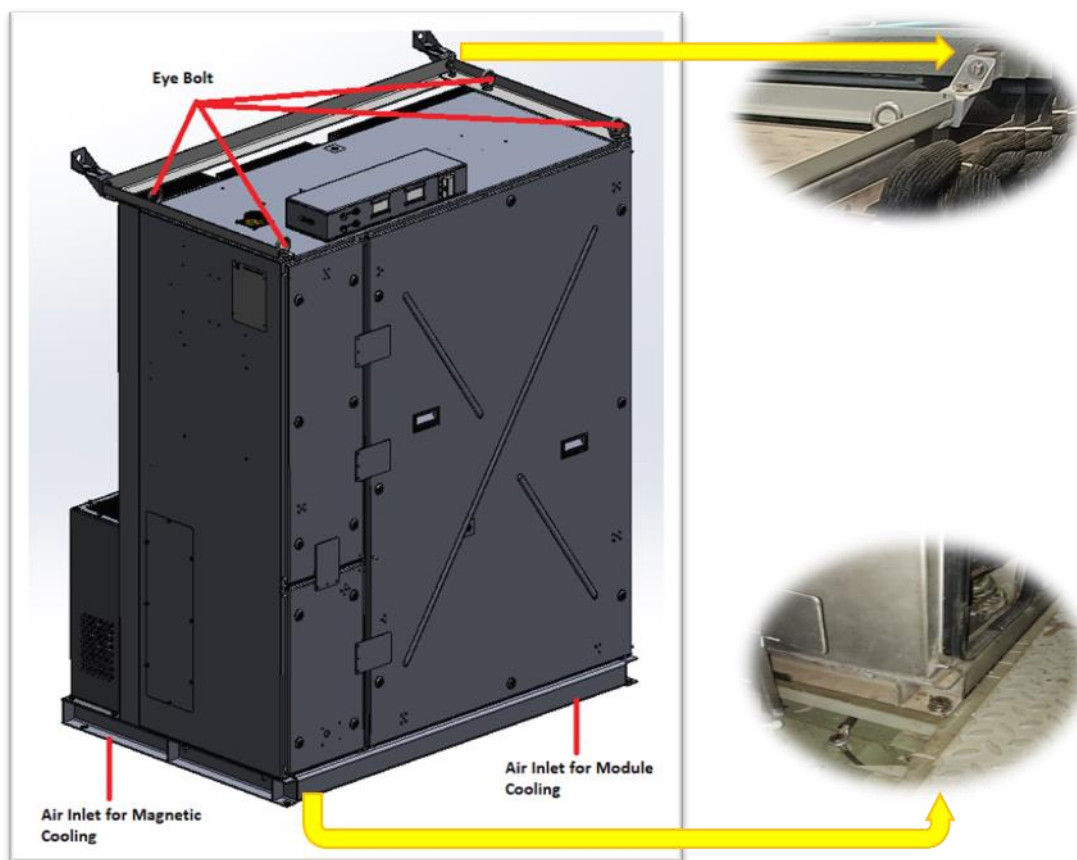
Base Bolt Mounting & Top Angle Brackets Mounting of Box2
